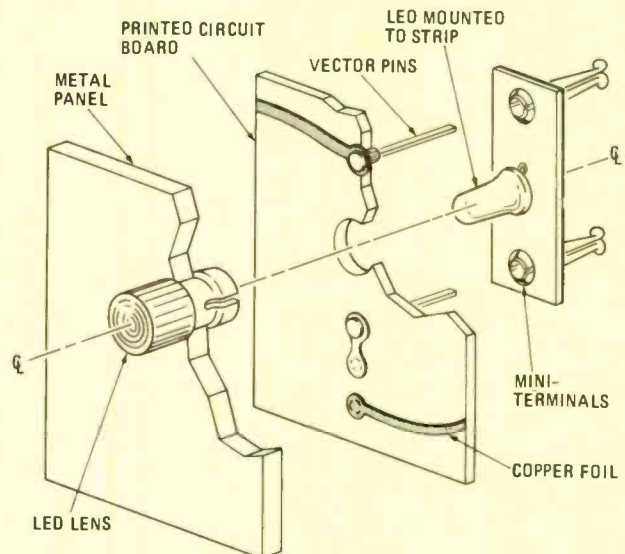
LED LENS ON THE FRONT PANEL mates with the PC board and the LED on its mounting strip.
